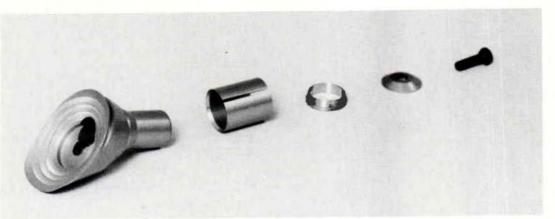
A – The internal clamping component. The pylon slips over this component and is held in place by the expansion of the component when the bolt is tightened.
